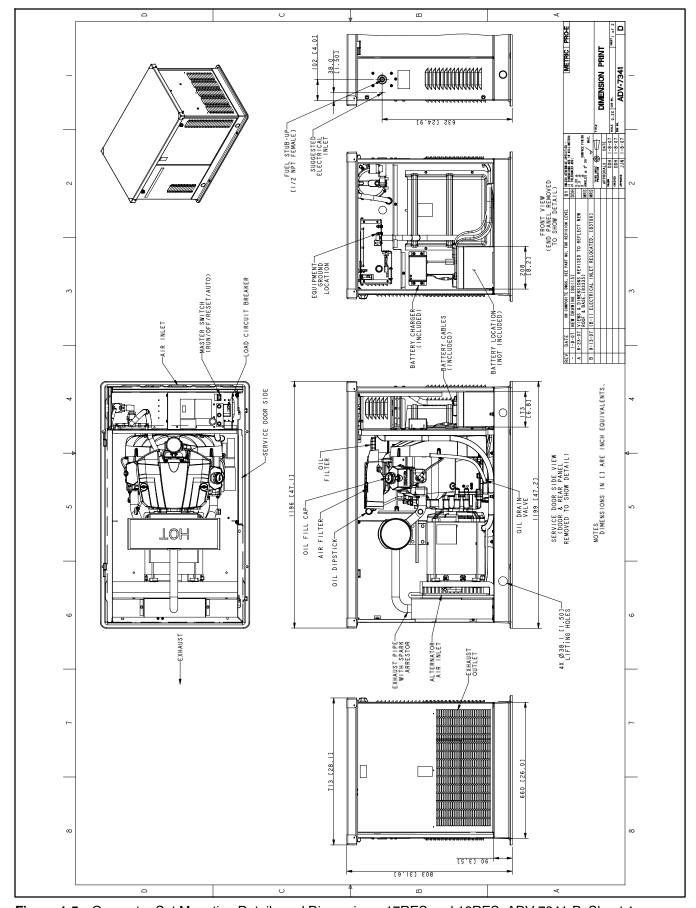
Generator Set Mounting Details and Dimensions, 17RES and 18RES, ADV-7341-B, Sheet 1
